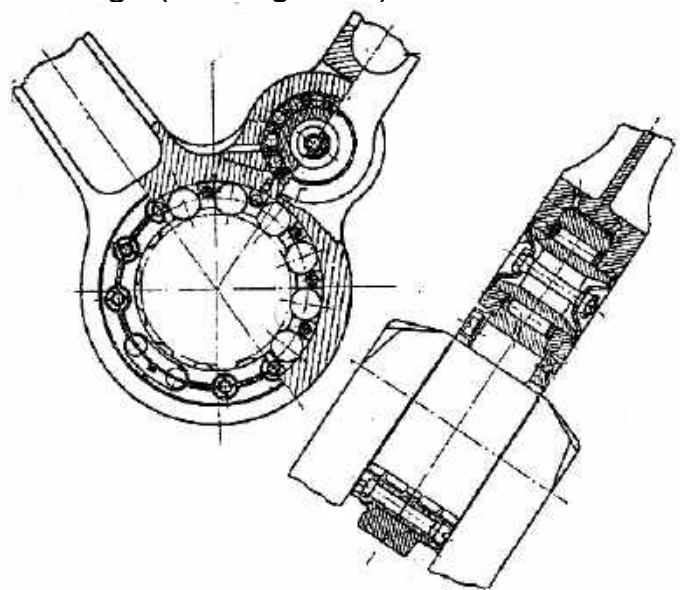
Non-detachable big end of the master connecting rod with the roller bearing
